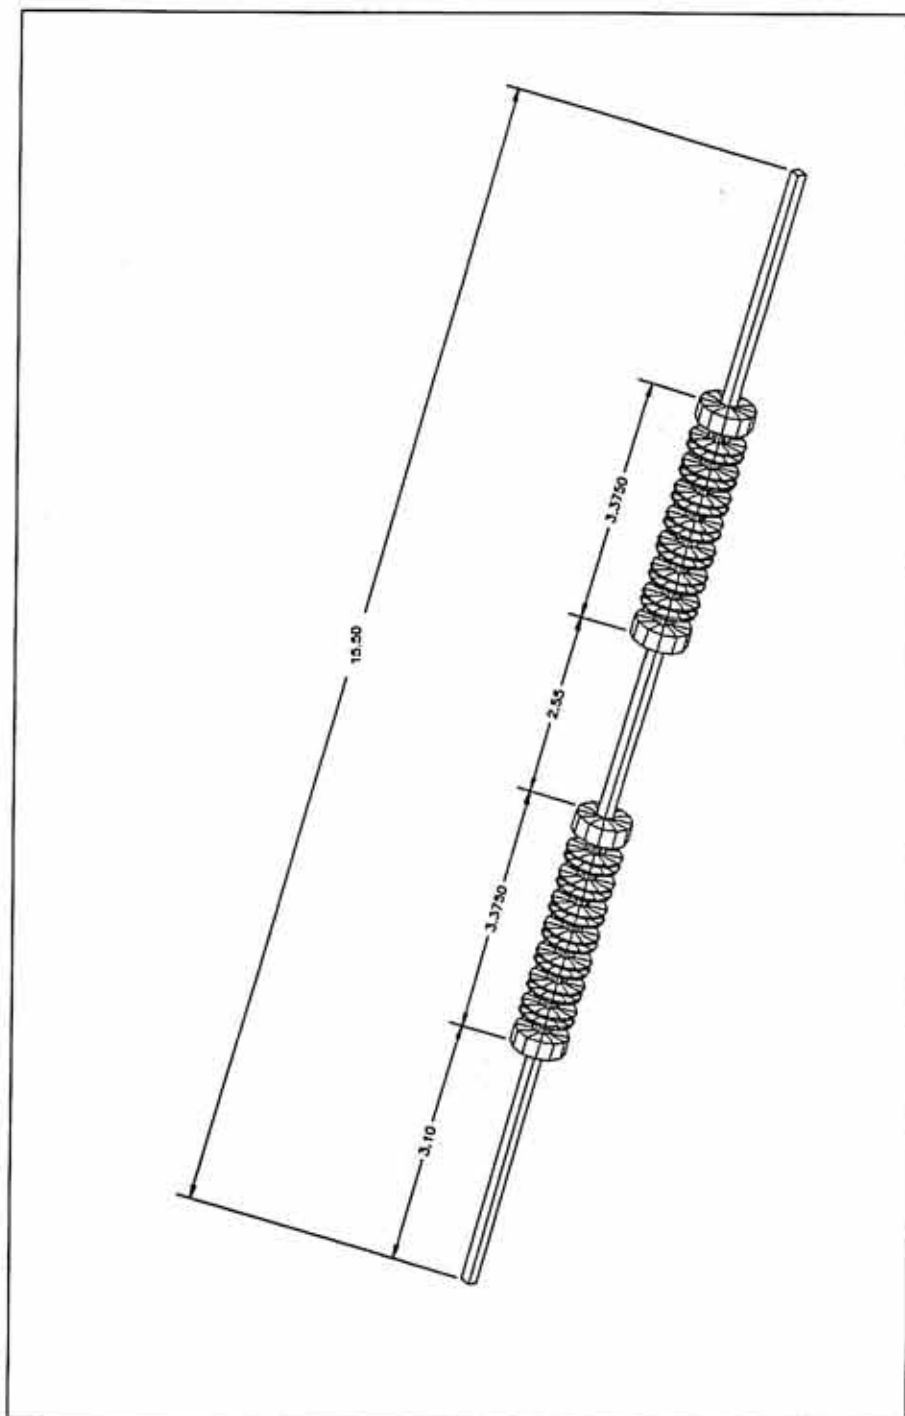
A sketch of the Polar and Wind search coil bobbins. Dimensions are given in inches.
